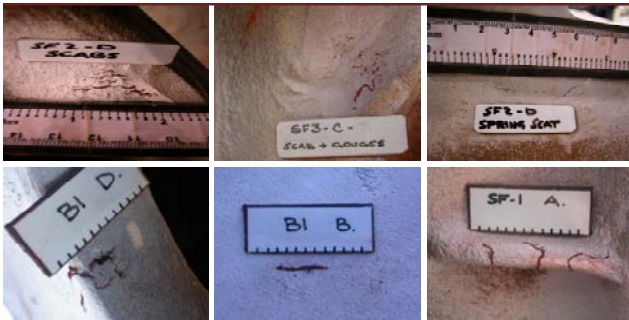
Photographs of Several Indications Found During Initial Inspection of Test Castings
